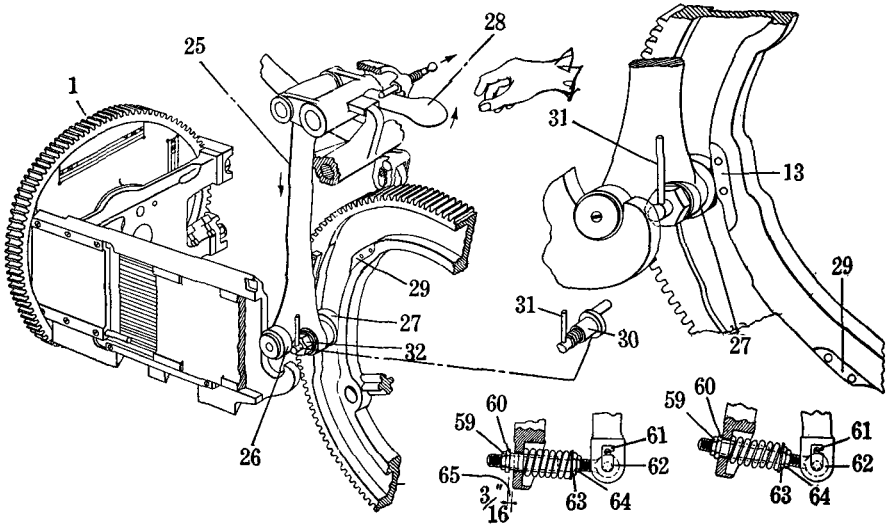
View showing the mold mechanism and the means of connecting and disconnecting the mold slide. In the view given the rolls 26 and 27 mounted on the mold cam lever are shown lifted, the handle 28 being underneath a little spring pin which holds it in its position. By pulling this pin outward the handle 28 is allowed to rise, lowering the mold cam lever 25 into position to connect with the mold slide.
